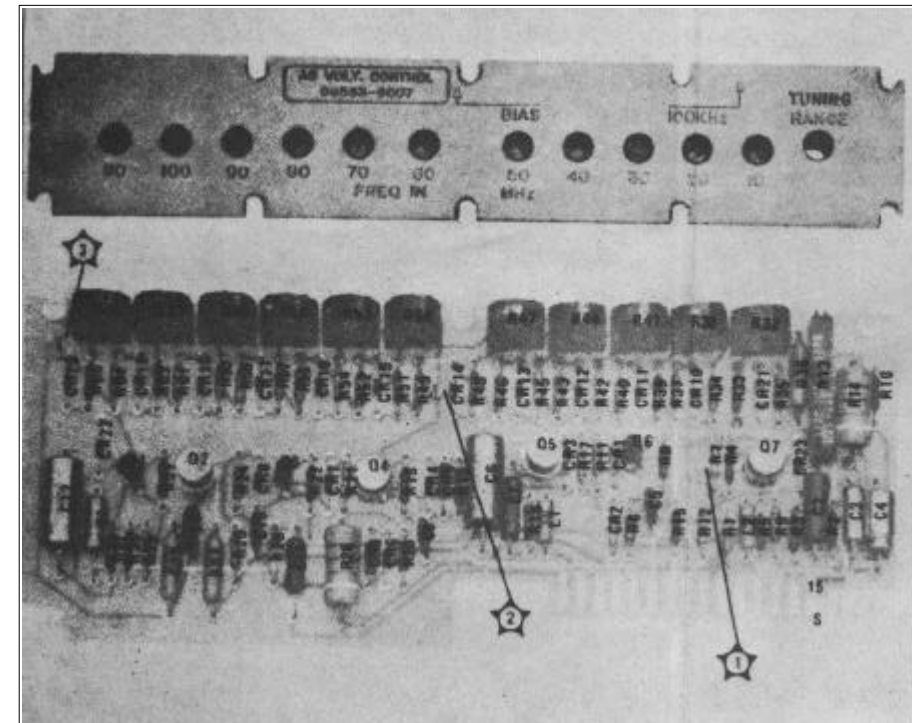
Voltage Control A5 (08553-6007) Adjustments, Test Points and Component Locations.
